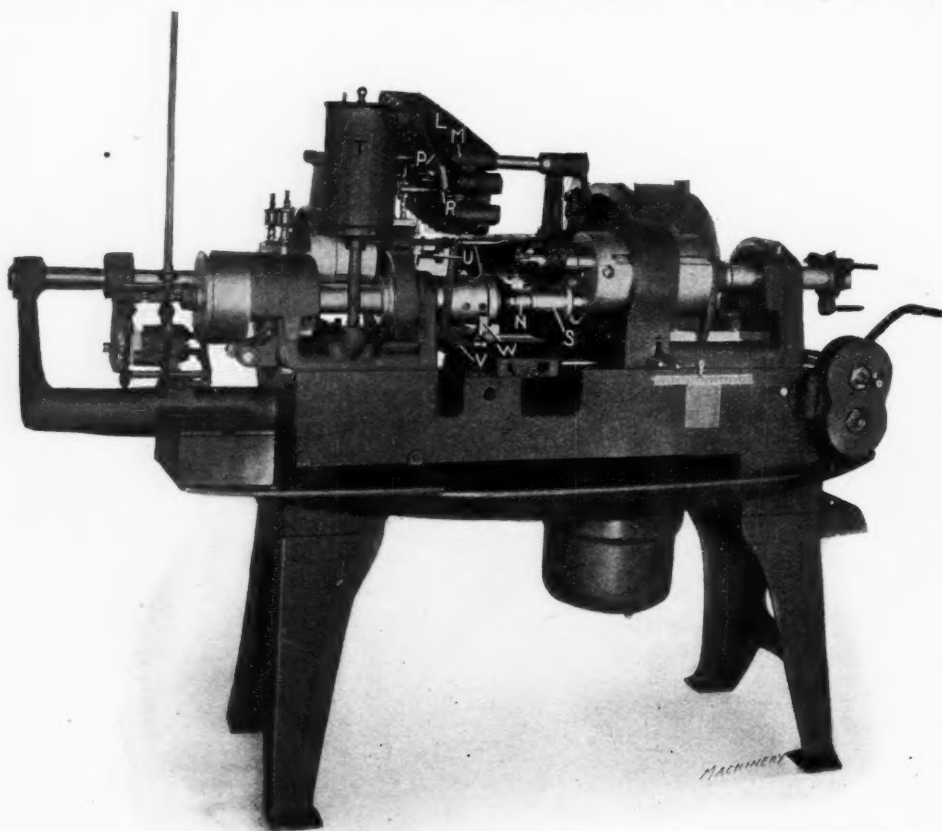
Arrangement of the Magazine and Chuck Mechanisms
